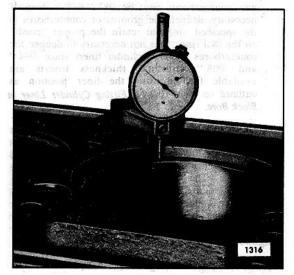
Checking Depth of Counterbore for Cylinder Liner with Tool J 22273
